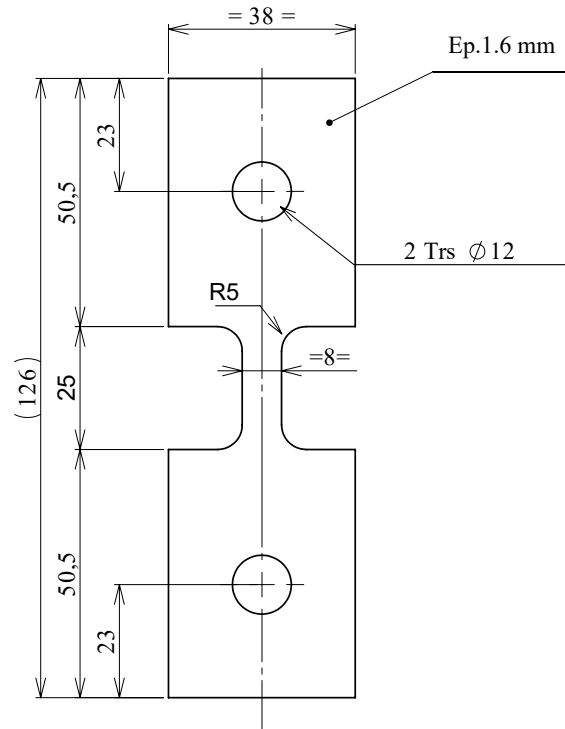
Two-dimensional TA6V specimen drawing used for tensile tests
